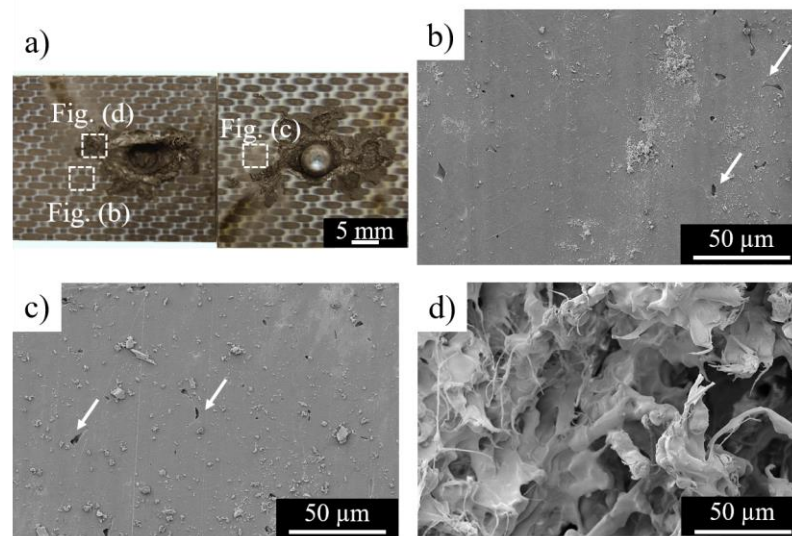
a) Typical fracture surface of the friction riveted joints after 28 days of hydrothermal aging; SEM images of the composite surfaces showing corrosion-induced cavitation from b) the lower, and c) the upper composite parts inside the overlap area; d) detailed view of the ductile failure of the squeezed material.
